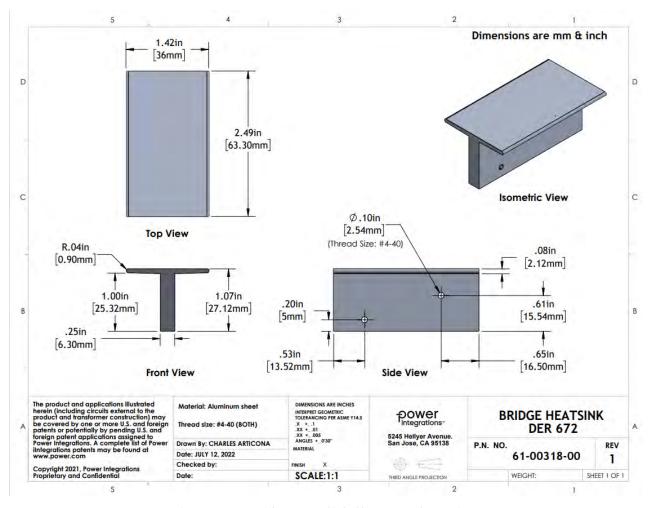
Bridge Heat Sink Sheet Metal Drawing.
